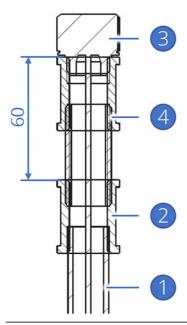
mechanical oil dipstick – installation angle 32,7°
